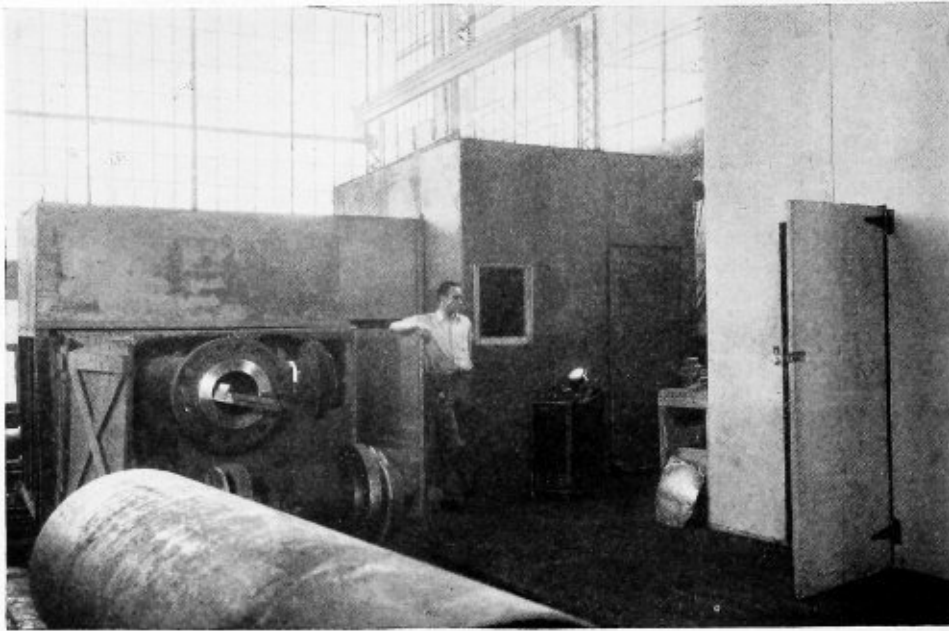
X-ray installation for the inspection of heavy steel castings
